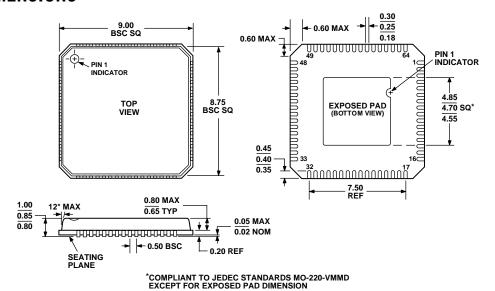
64-Lead Lead Frame Chip Scale Package [LFCSP] (CP-64) Dimensions shown in millimeters
